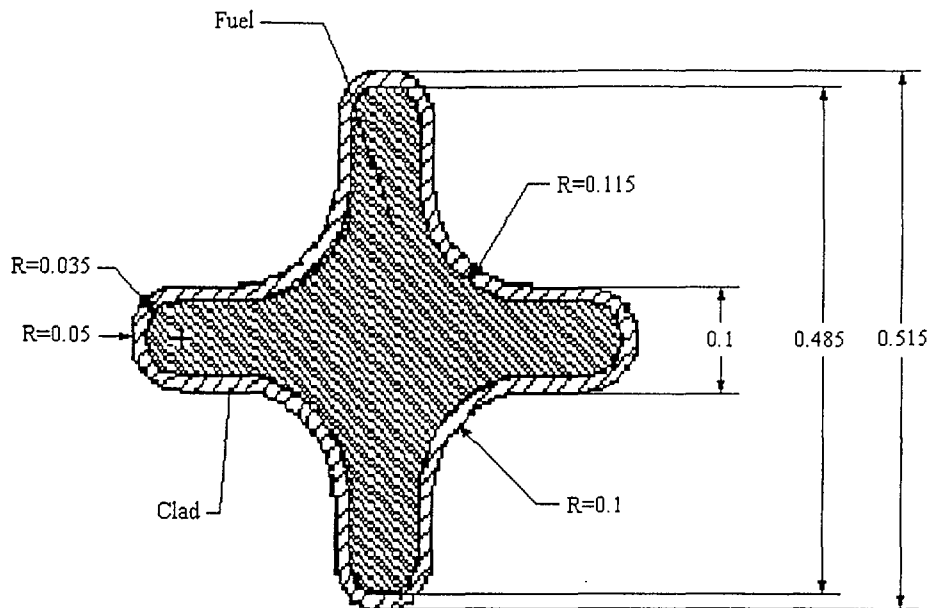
Cross Section of Cross-Shaped Fuel Rod for HCT-004 (dimensions in cm)
